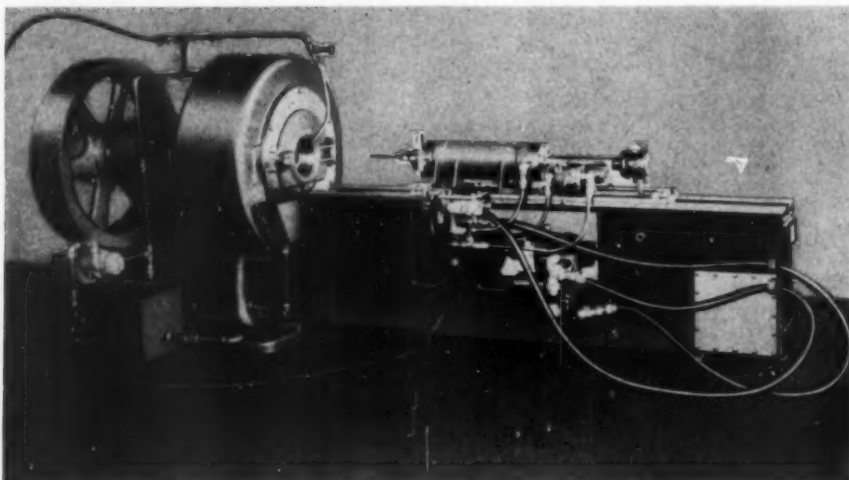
Right—Fenn Mfg. Co. swager with hydraulic feed arrangement used in producing the blank shown in Fig. 3
